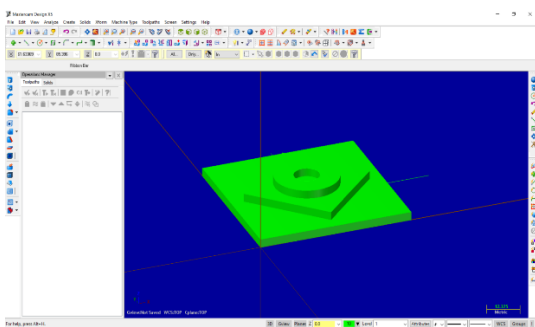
CNC milling 3D drawing using Master Cam Design X5
